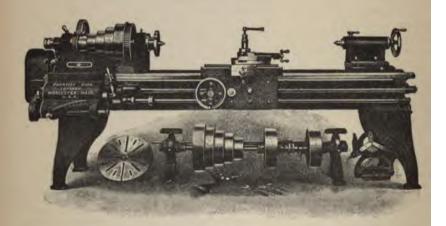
, (Shows Quick Change Gear Pattern.) 18
